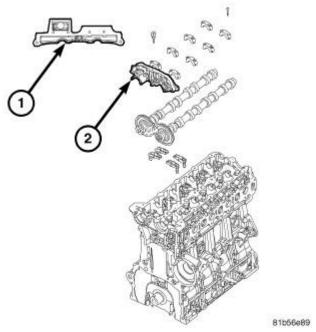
Front Camshaft Bearing Journal Courtesy of CHRYSLER LLC
